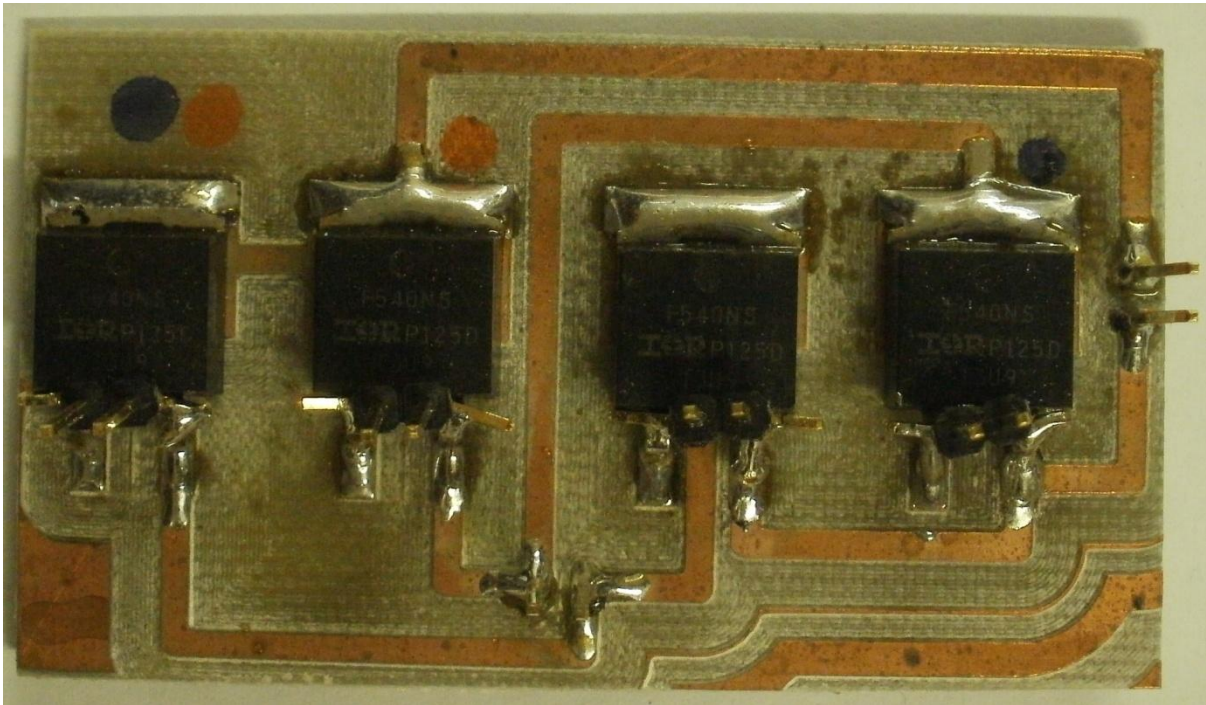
Device Under Test 2 PCB (Second Baseline)
